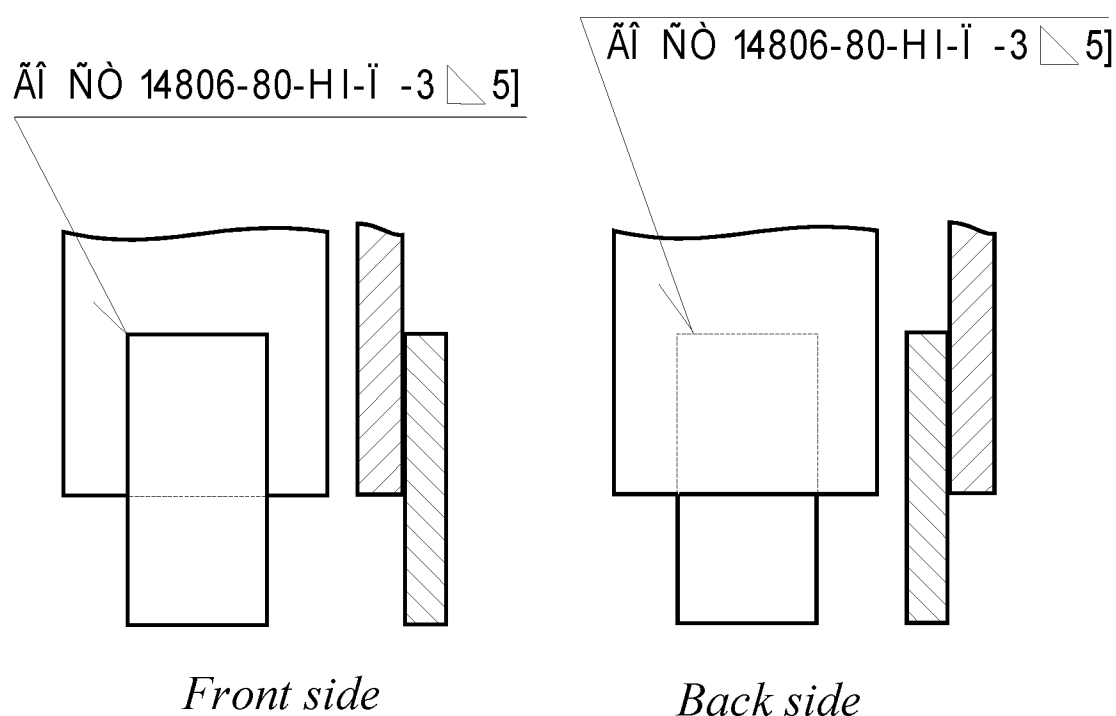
Examples of the conventional symbols of the welded joints in the drawings
